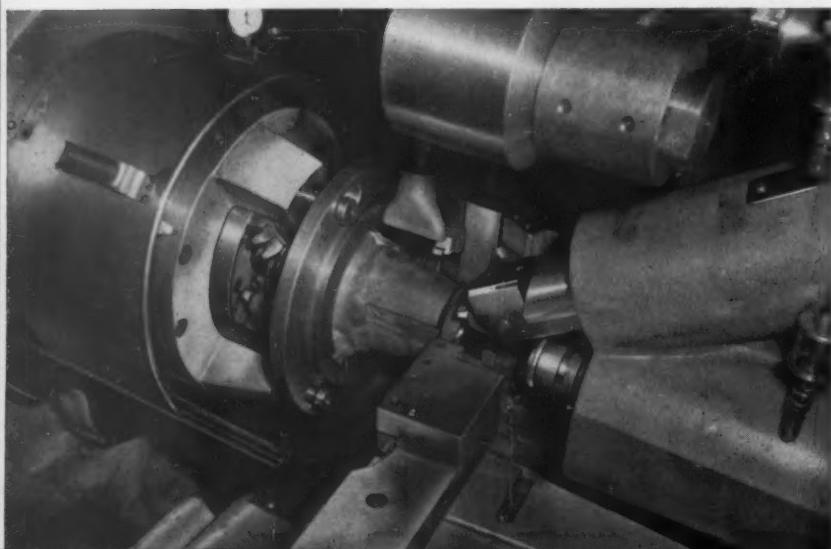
The dual-spindle design of the tailstock holds both the chamfering tool and the revolving center.
